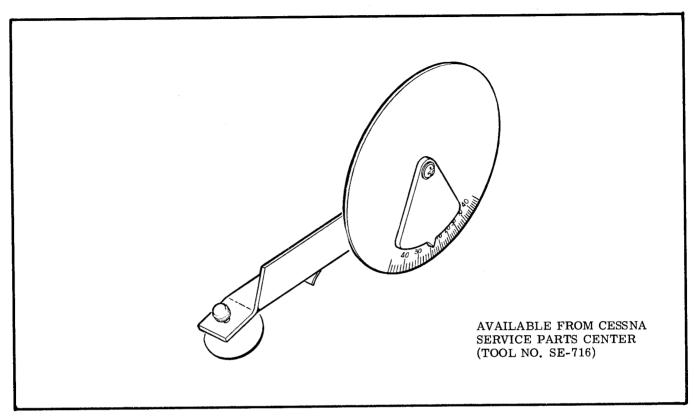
Inclinometer for Measuring Control Surface Travels
